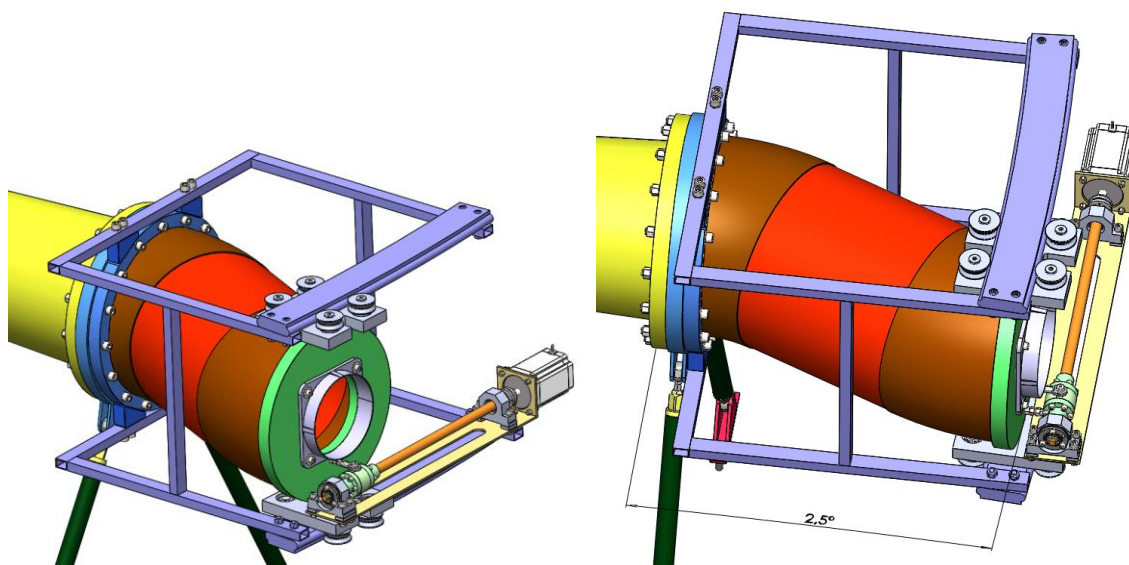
Deflected bellows weldment assembly in extreme position
